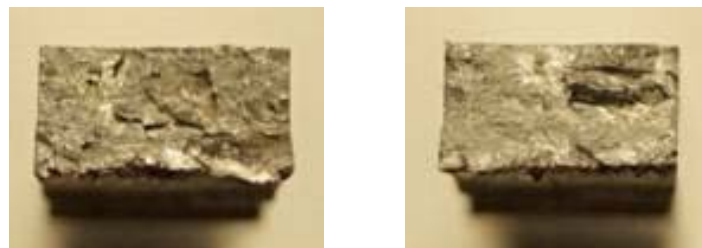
Fracture of sample 1 and 2 (cooled by cold air)
